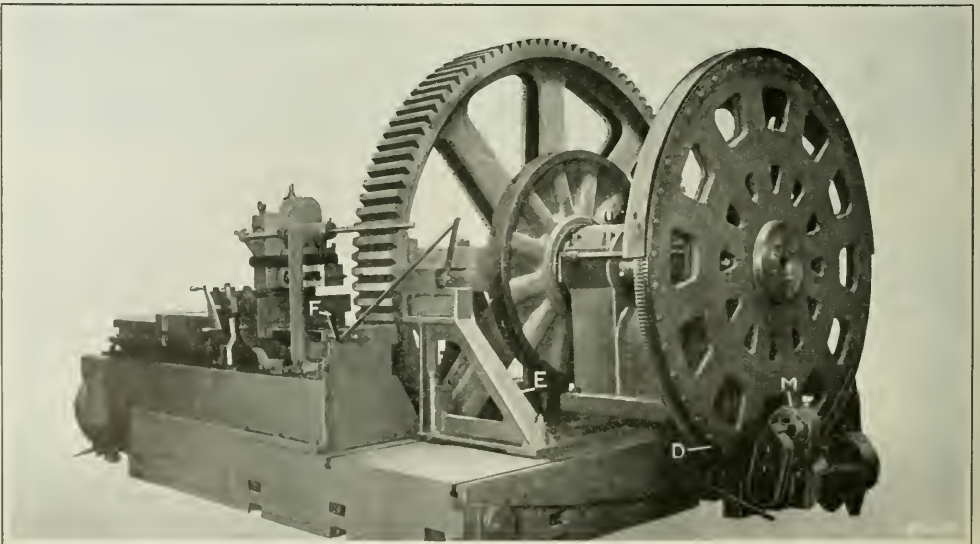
View of a Spur Gear Planer showing the Indexing Mechanism and Large Dividing Wheel
